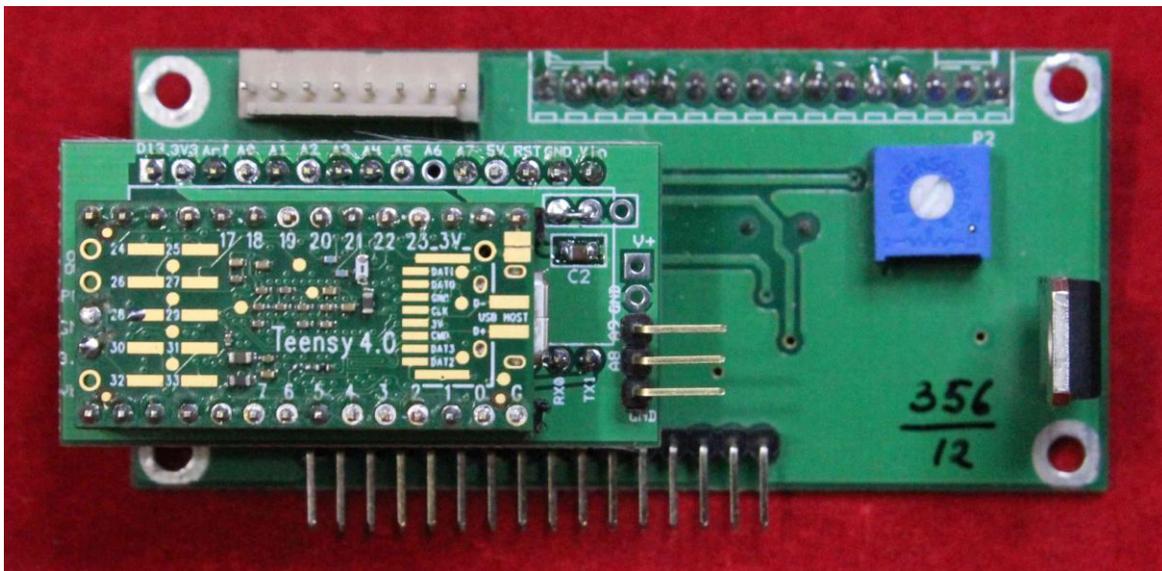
Completed Adapter with Teensy 4.0 on board plugged into an older V5
